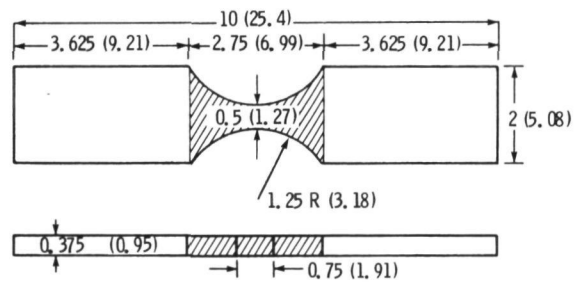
Geometry and dimensions of fatigue test specimen. Test section is shaded area. Dimensions are in inches (cm).
